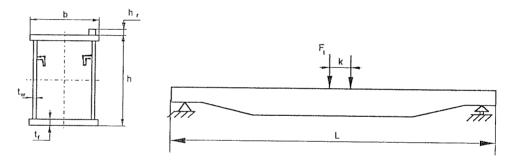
Cross section of the welded main girder of overhead travelling crane
